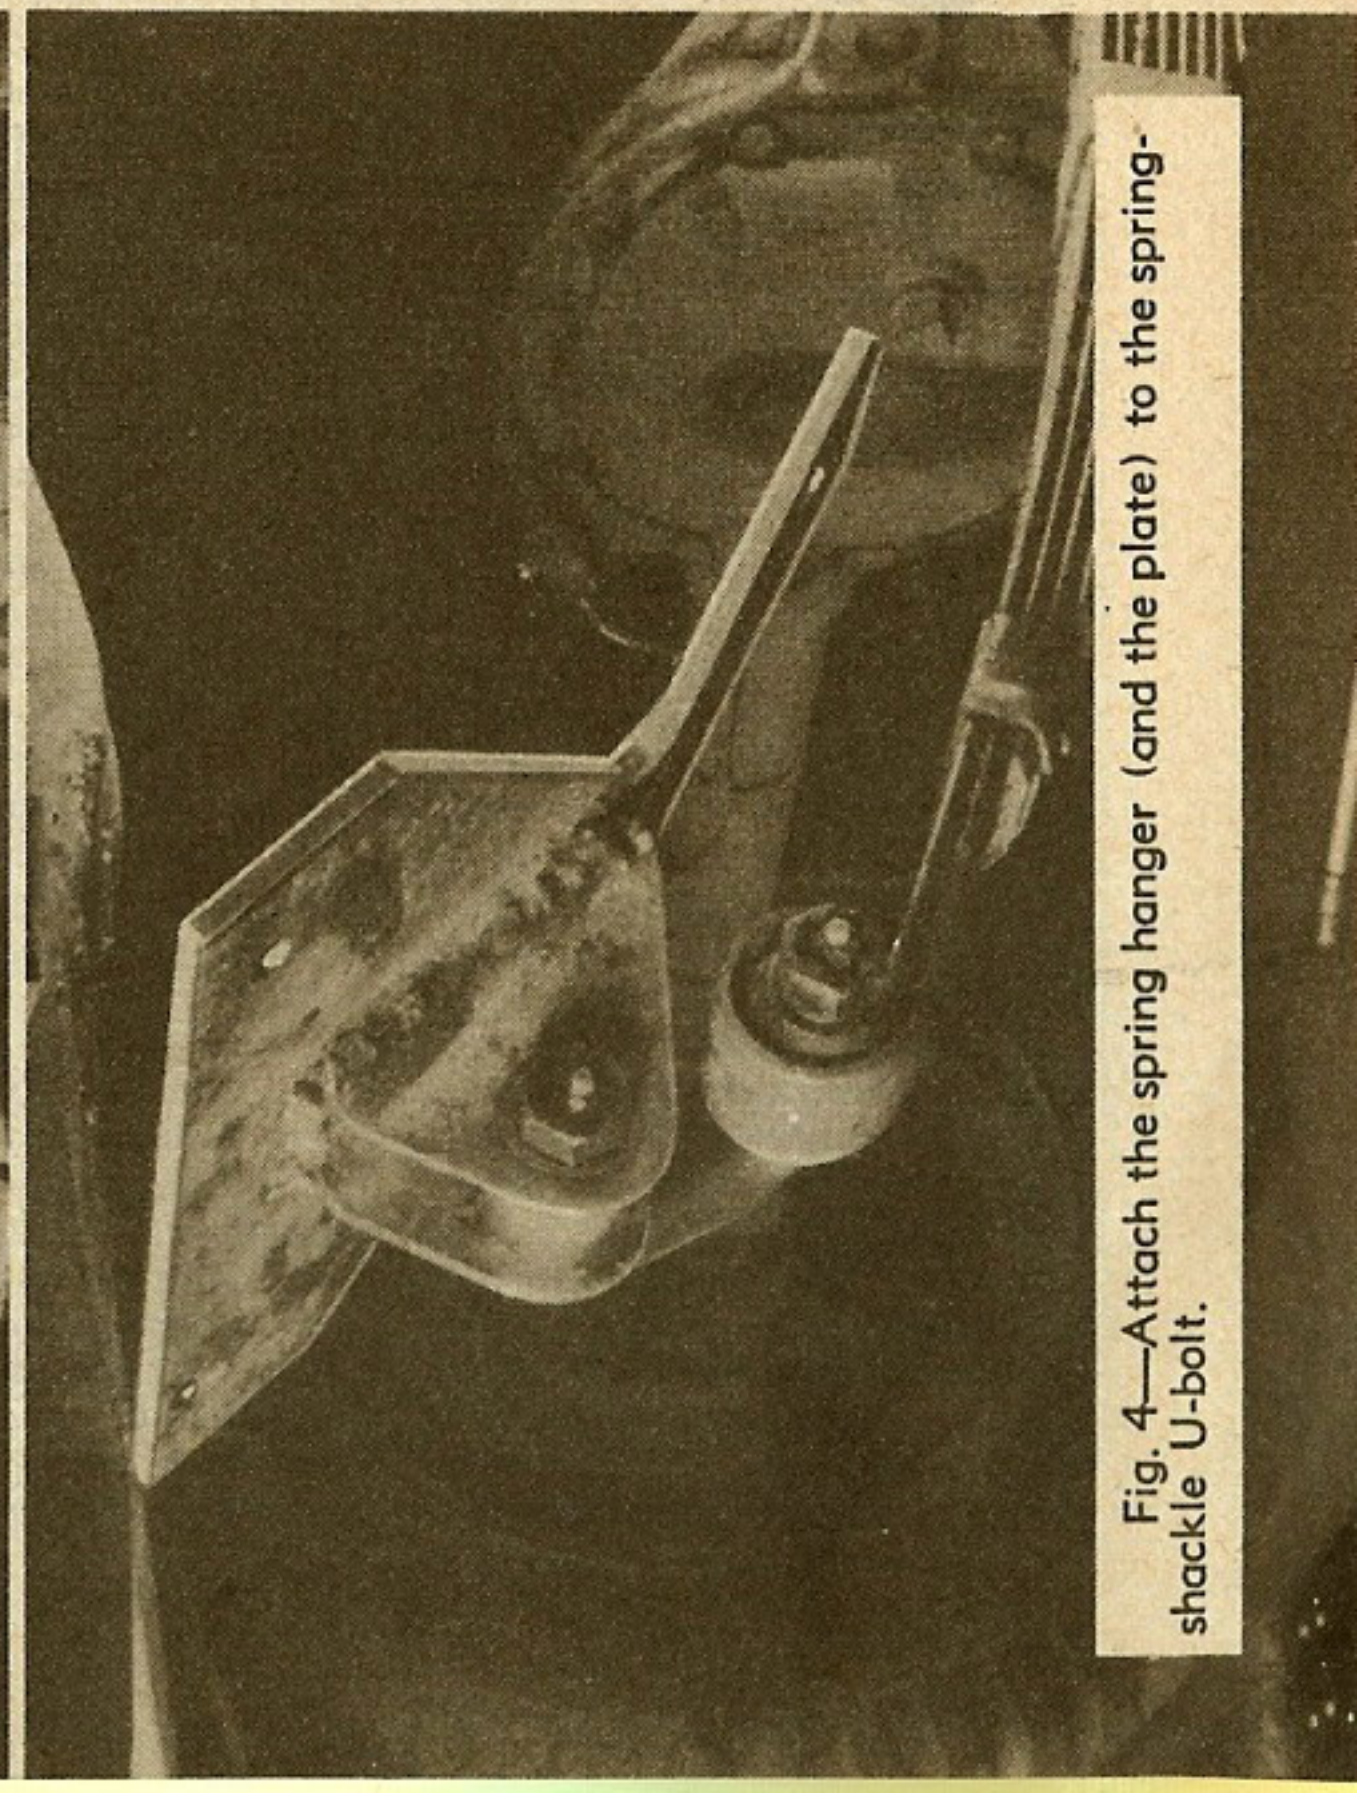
Attach the spring hanger (and the plate) to the spring-shackle U-bolt.
